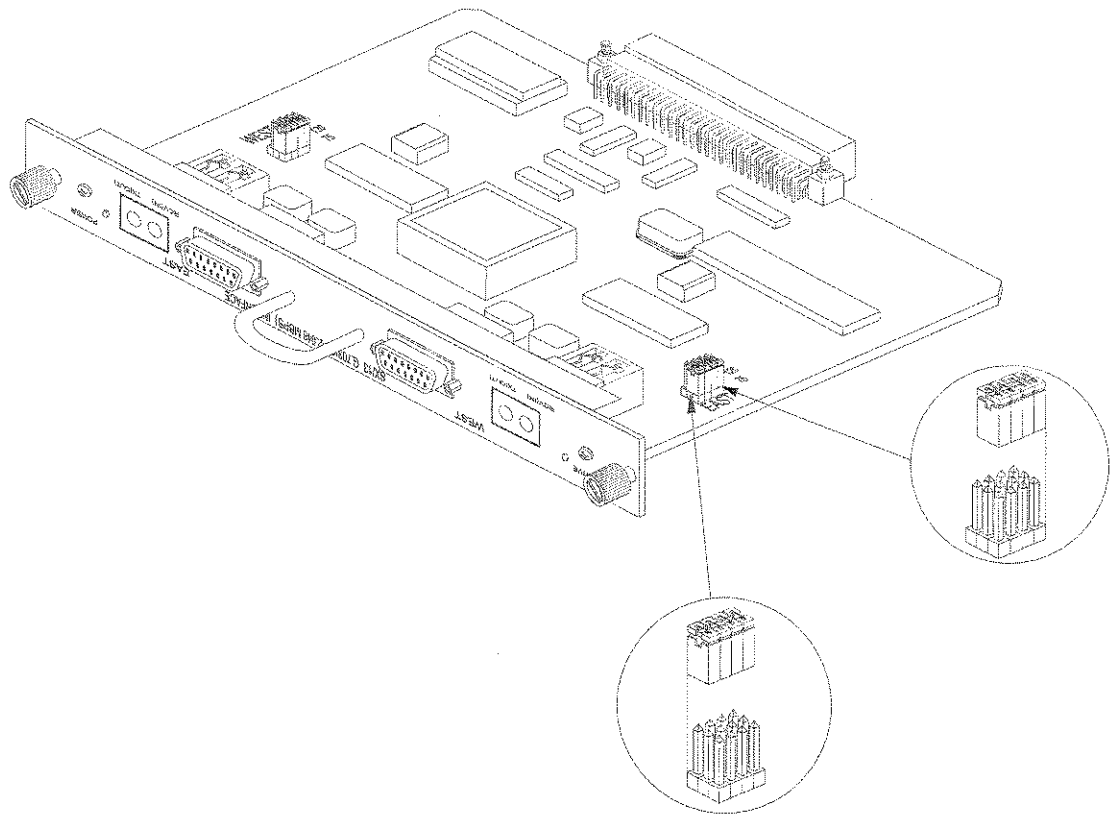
G.703 (E1 2.048 Mbps) Interface Jumper Locations
